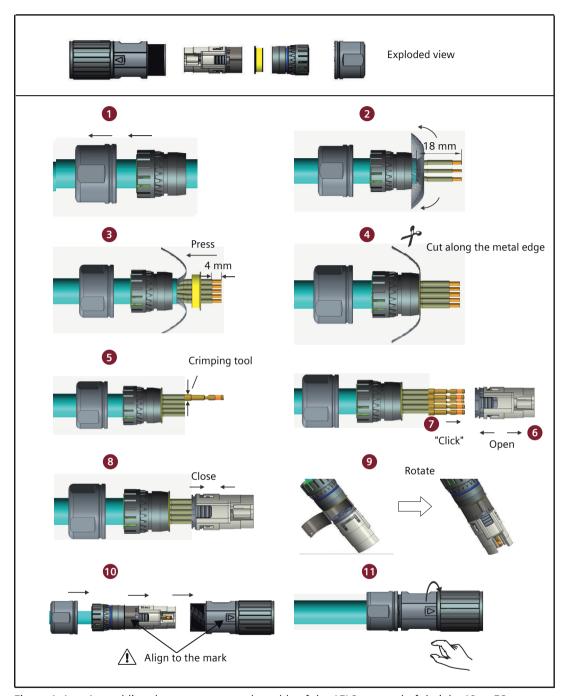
Assembling the power or encoder cable of the 1FL2 motor shaft height 48 or 52
